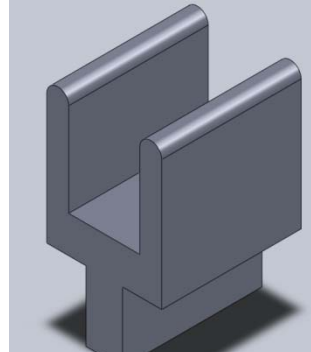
3-Point bending fixture can be mounted in an Instron machine outfitted with clamping jaws.
